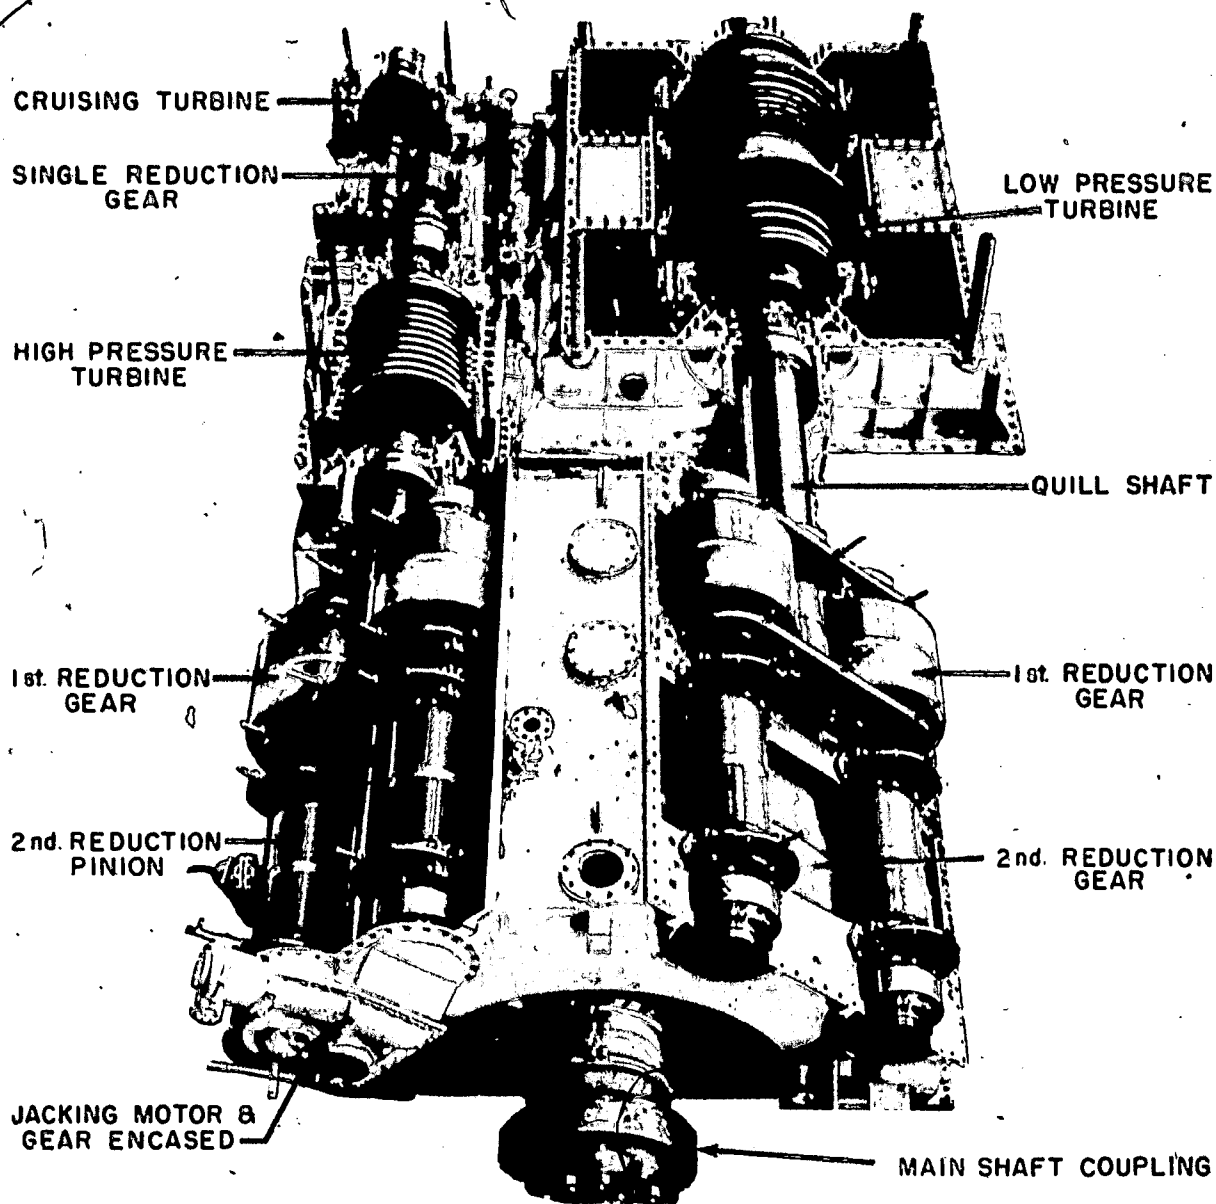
Turbine and locked train double reduction gearing installed on a DD-692 class destroyer.
